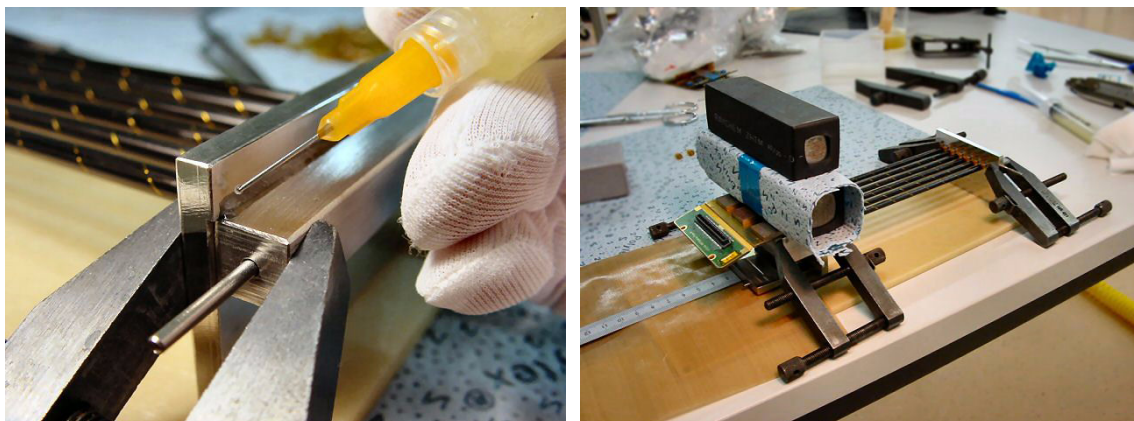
Crimping of the outer (left) and inner (right) crimp tube.
